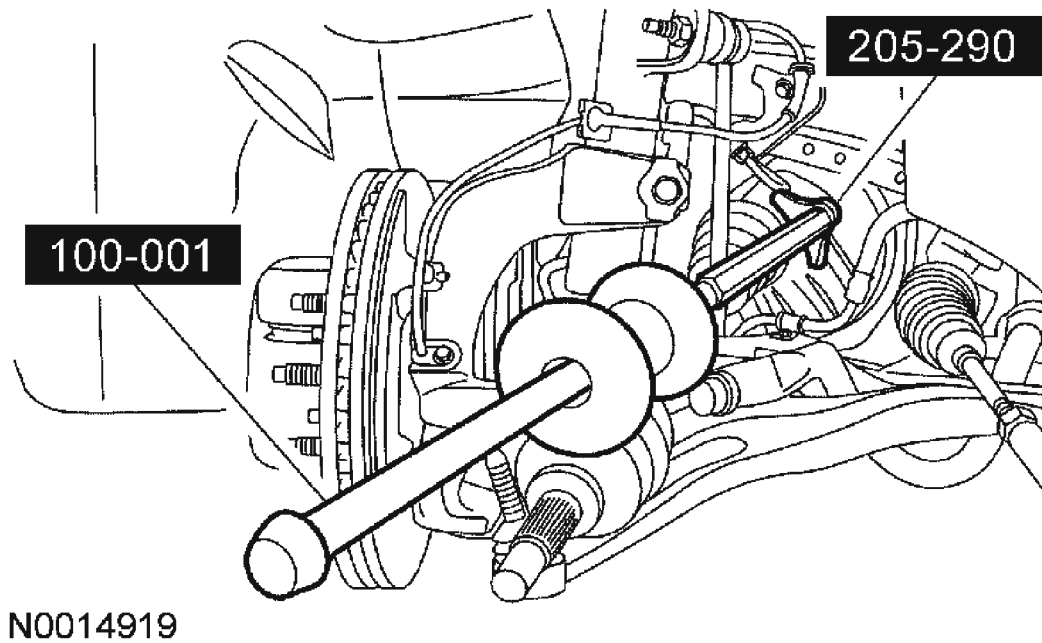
Removing LH Drive Halfshaft From Transaxle
